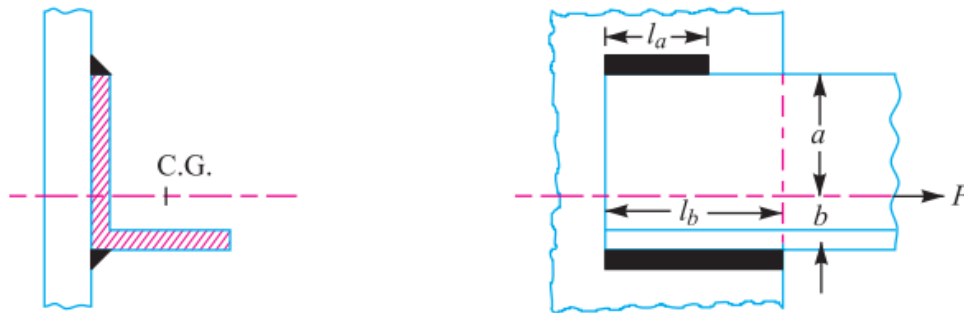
Axially loaded unsymmetrical welded section.
